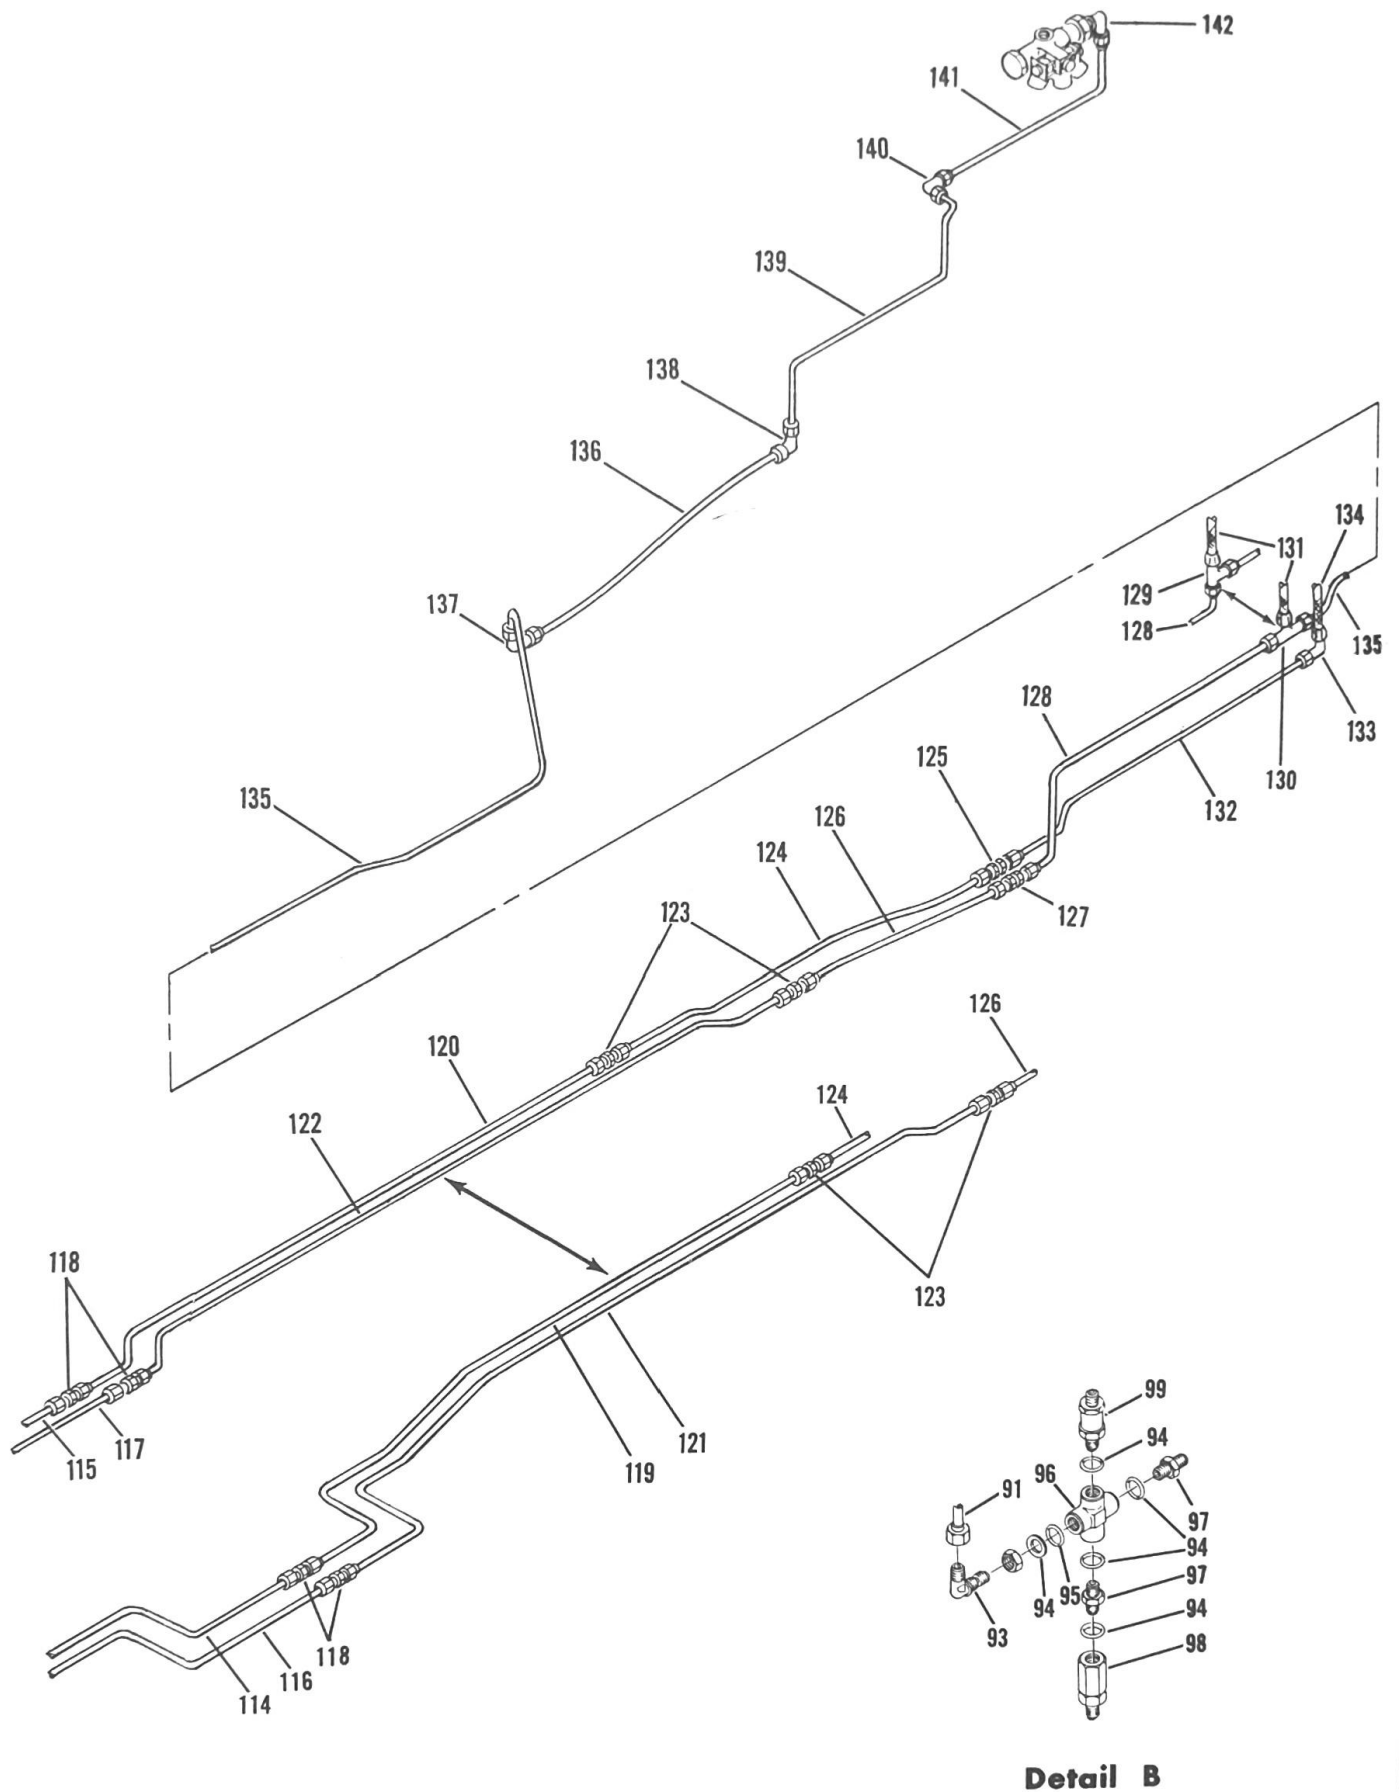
Gear & Brake Emergency Pneumatic System Installation (Sheet 2 of 2)
